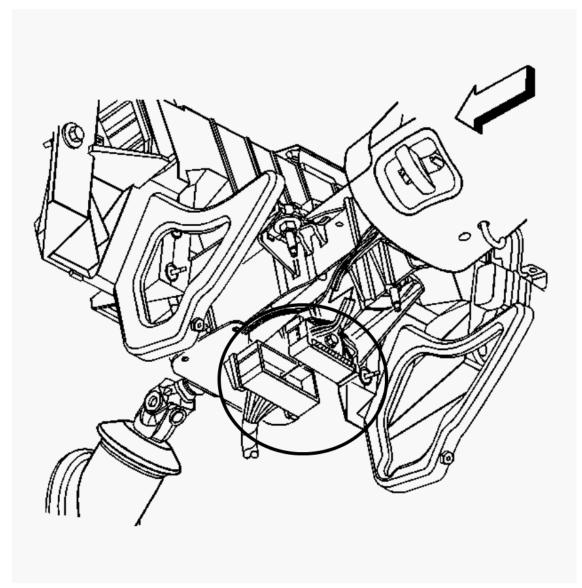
Disconnecting/Reconnecting Steering Column Electrical Connector Courtesy of GENERAL MOTORS CORP.
